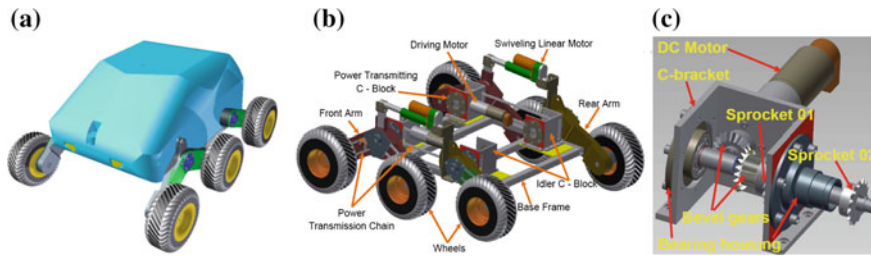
a 3D concept model. b Mechanical chassis with drive and transmission system. c Integrated drive unit fitted with a DC motor
